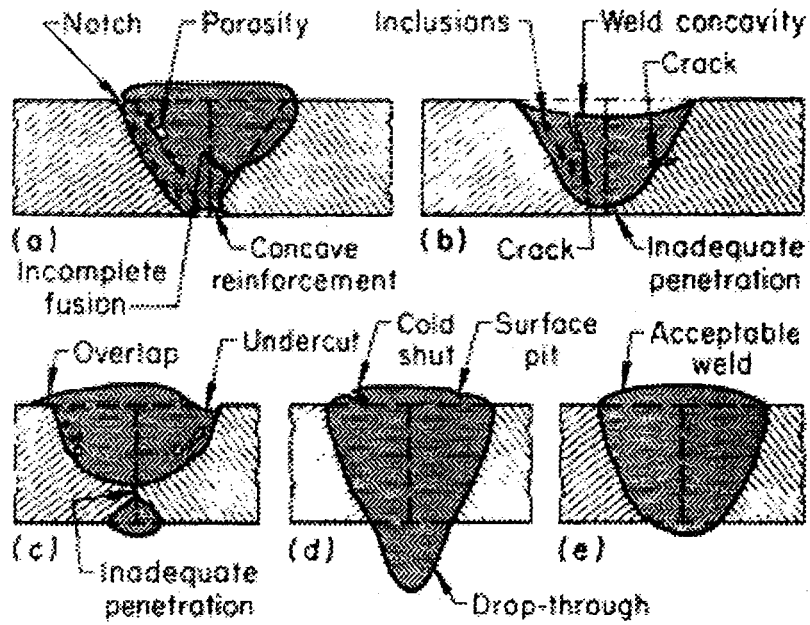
Schematic diagram of weld defects [14]
